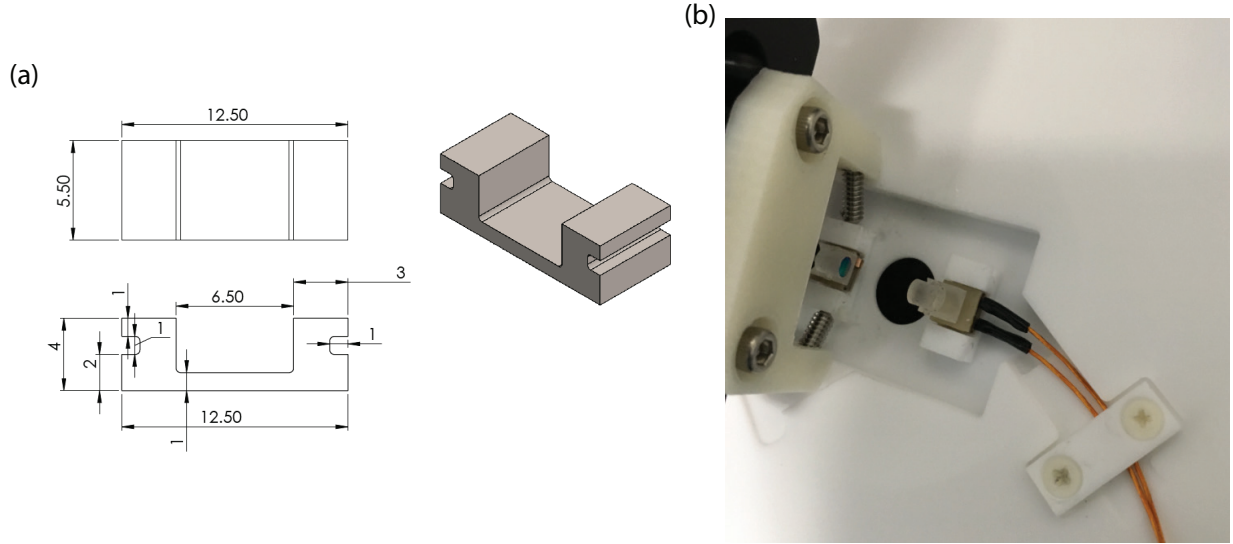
(a) CAD drawing of Macor cavity alignment block. Dimensions in mm. Central flat spot is where the shear-stack piezo is epoxied. The small grooves on the side are to make the block easier to grab with a macroscopic clamp for alignment. (b) Photograph of optical cavity near the end of assembly. The cavity mirrors, vee blocks, piezos and alignment blocks are clearly seen. The strain relief for the cavity piezo wires on the right can be seen. The cavity alignment block on the left is being grabbed by two angle tipped set screws protruding from a 3D-printed cavity grabber piece. The cavity grabber is mounted to a Thorlabs tip-tilt optics mount which is in turn mounted on a 3-axis translation stage. Here the mirror on the right is already epoxied to the science platform and the mirror on the left is being positioned in preparation for the final alignment-sensitive epoxy step to complete the cavity assembly.
